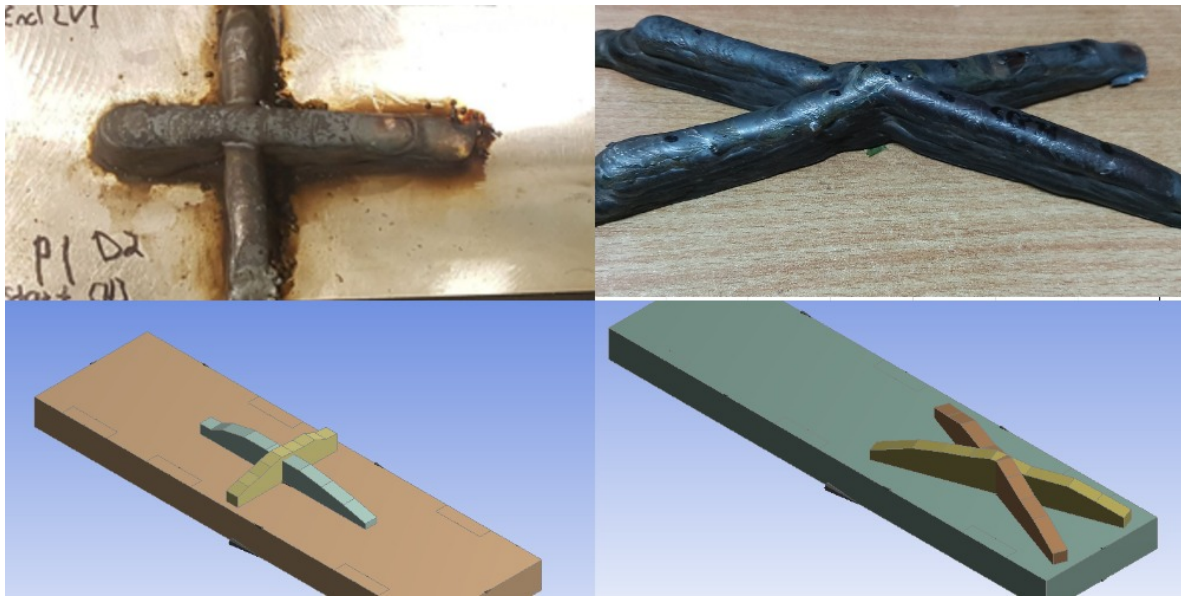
Welding design from the master thesis "Thin Wall Structure by Welding" by Hans Ivar Arumairasa.
